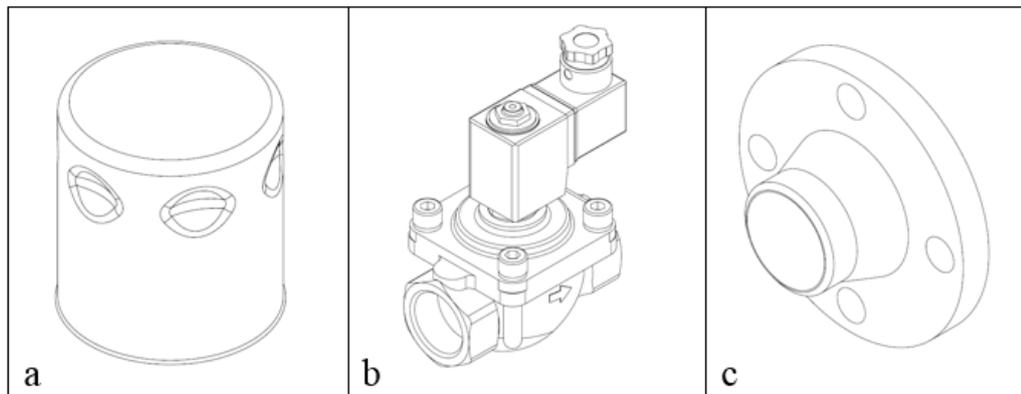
a) Air breather (mod. Airfil Oy, p. 5), b) Air valve (Festo 2016m, p. 6) & c) Pipe flange (McMaster-Carr 2015i, p. 24).
